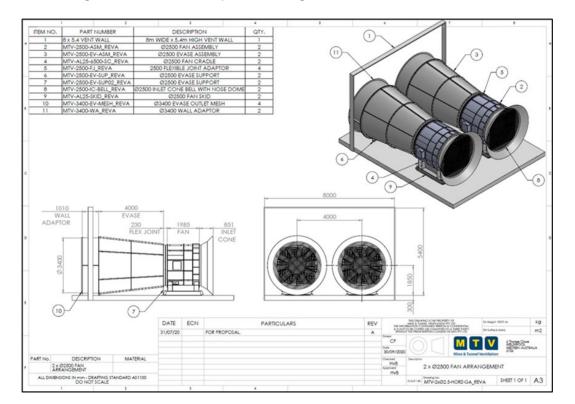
Example of Underground Fan Station Care of MTV
